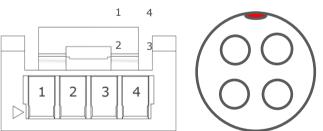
Numbering 4-pin connectors; left Molex (cable entry view), right ODU (solder cup view).
